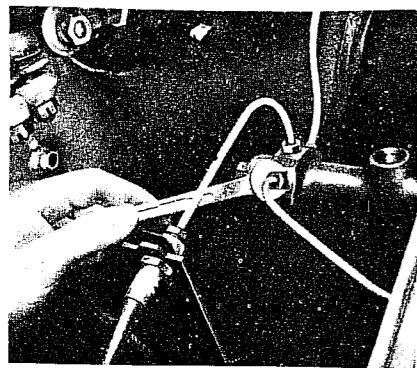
Disconnecting the brake lines from the master cylinder (single-line system).
